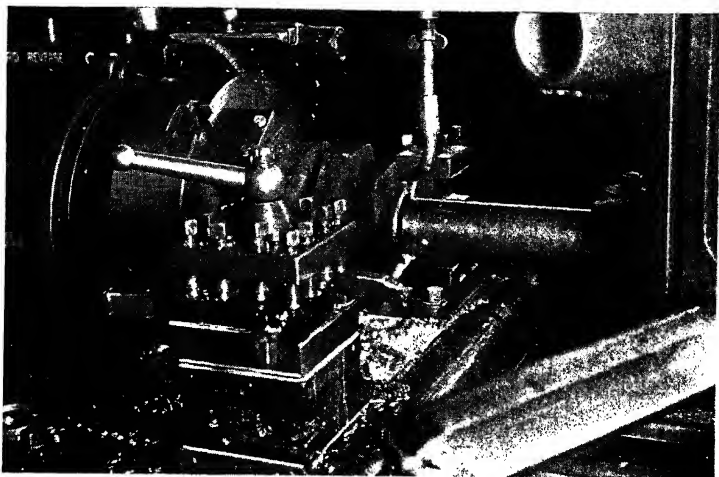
PRODUCTION OF LARGE MACHINED FITTING ON NO. 8 WARD LATHE (1).
